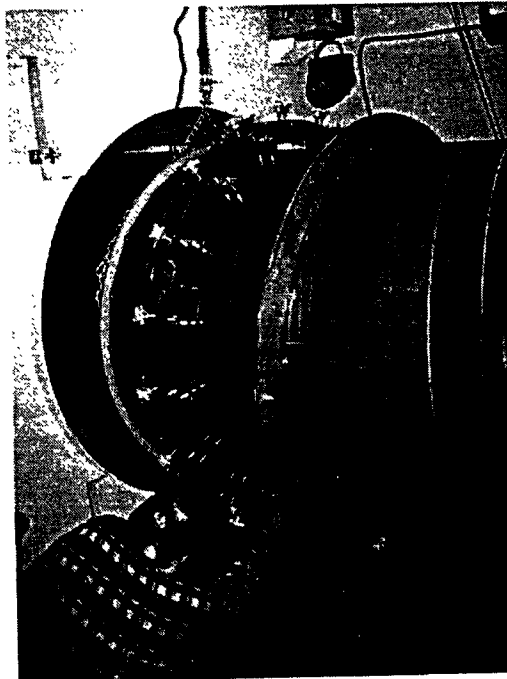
Inside the weld enclosure during fit-up
